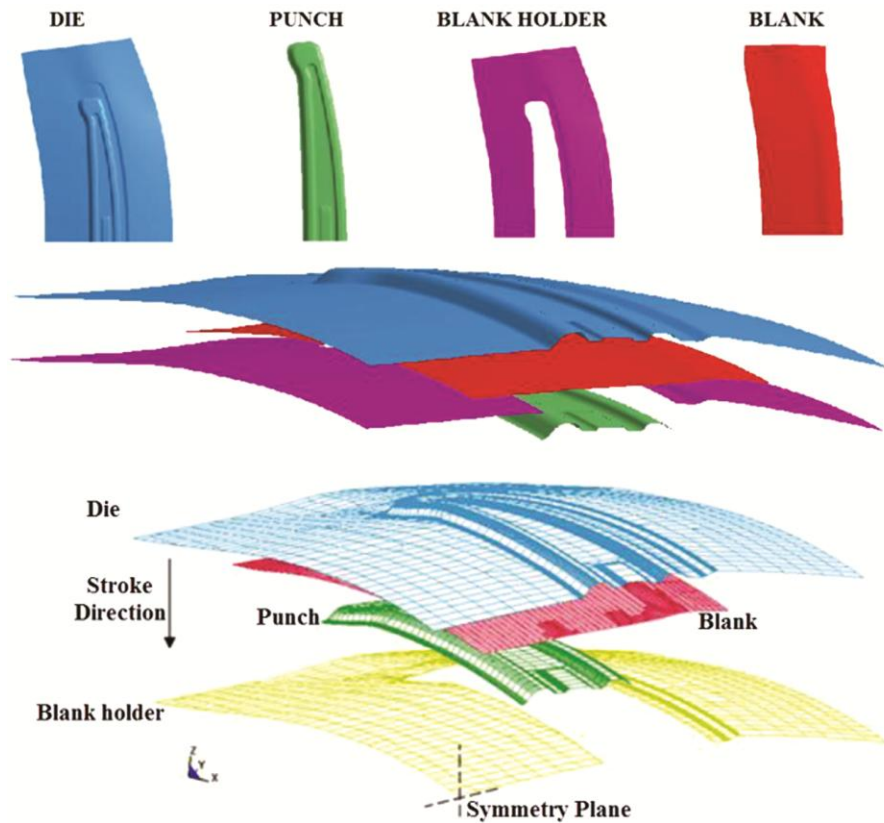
Die tool surfaces and finite element model of roof stiffener stamping process.
